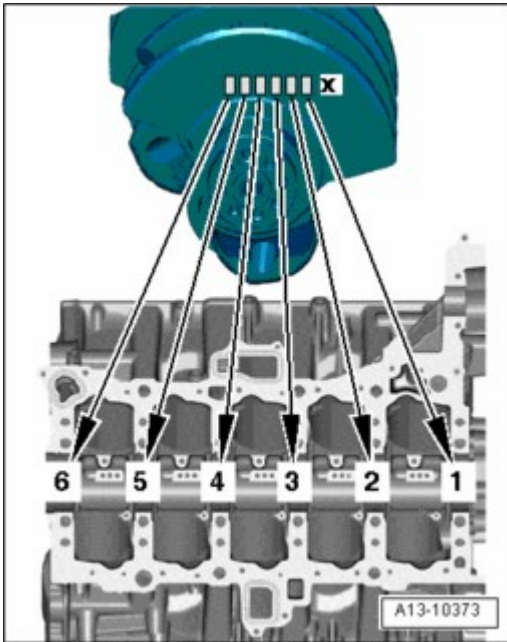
Allocation Of Crankshaft Bearing Shells For Guide Frame - Version II
